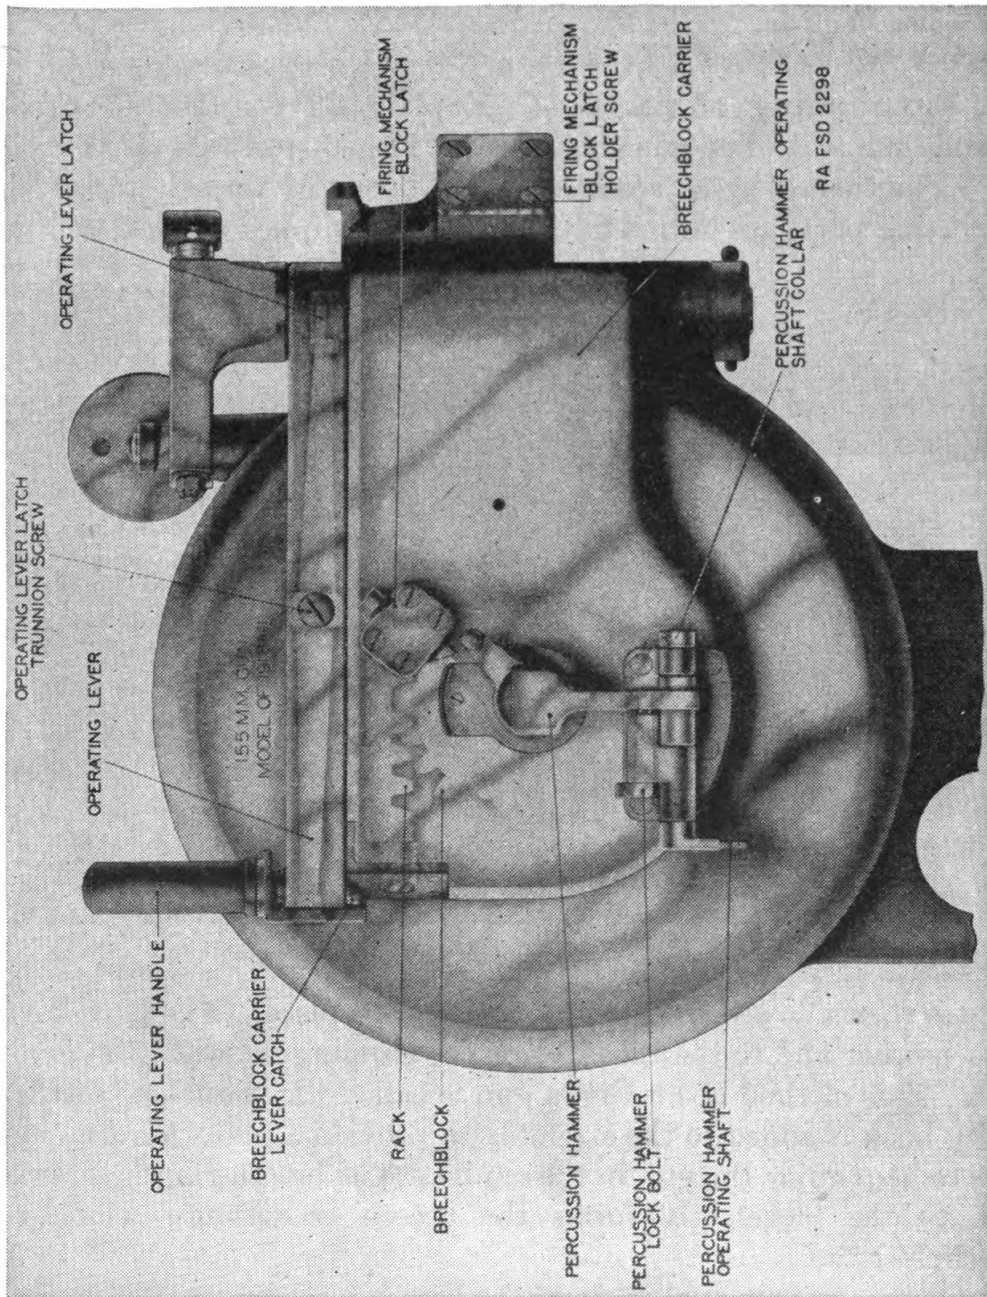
Breech mechanism, 155-mm gun M1918—assembled view.
